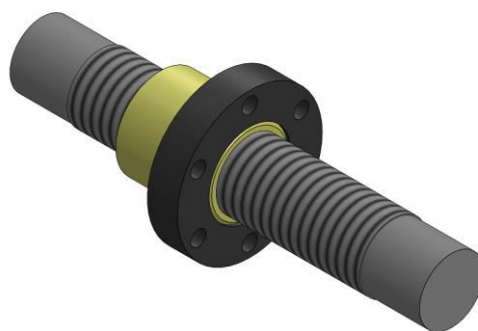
Threaded nut and leadscrew for the first adjustable brake.
